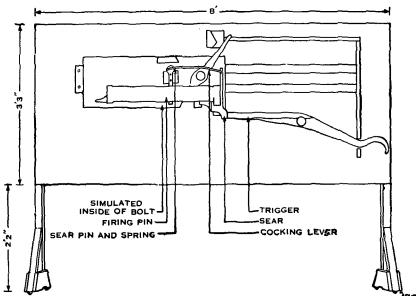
Wooden working model of firing mechanism to demonstrate trigger action, cocking, and automatic fire of the Browning machine gun, caliber .30, M1917A1.
